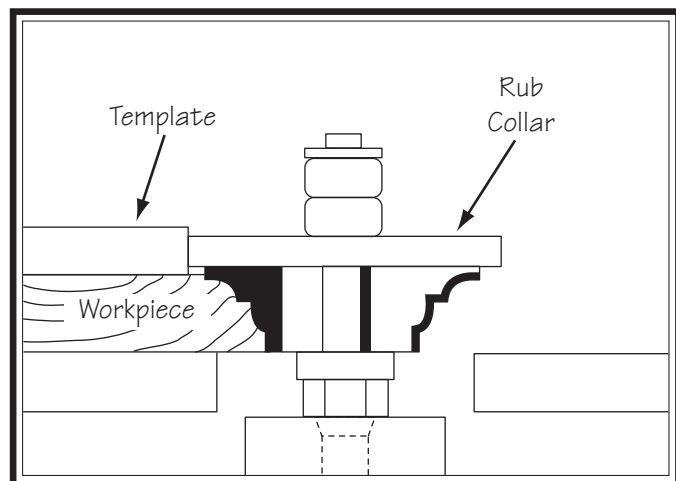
Position of pattern on workpiece and bearing size determine depth of cut.
